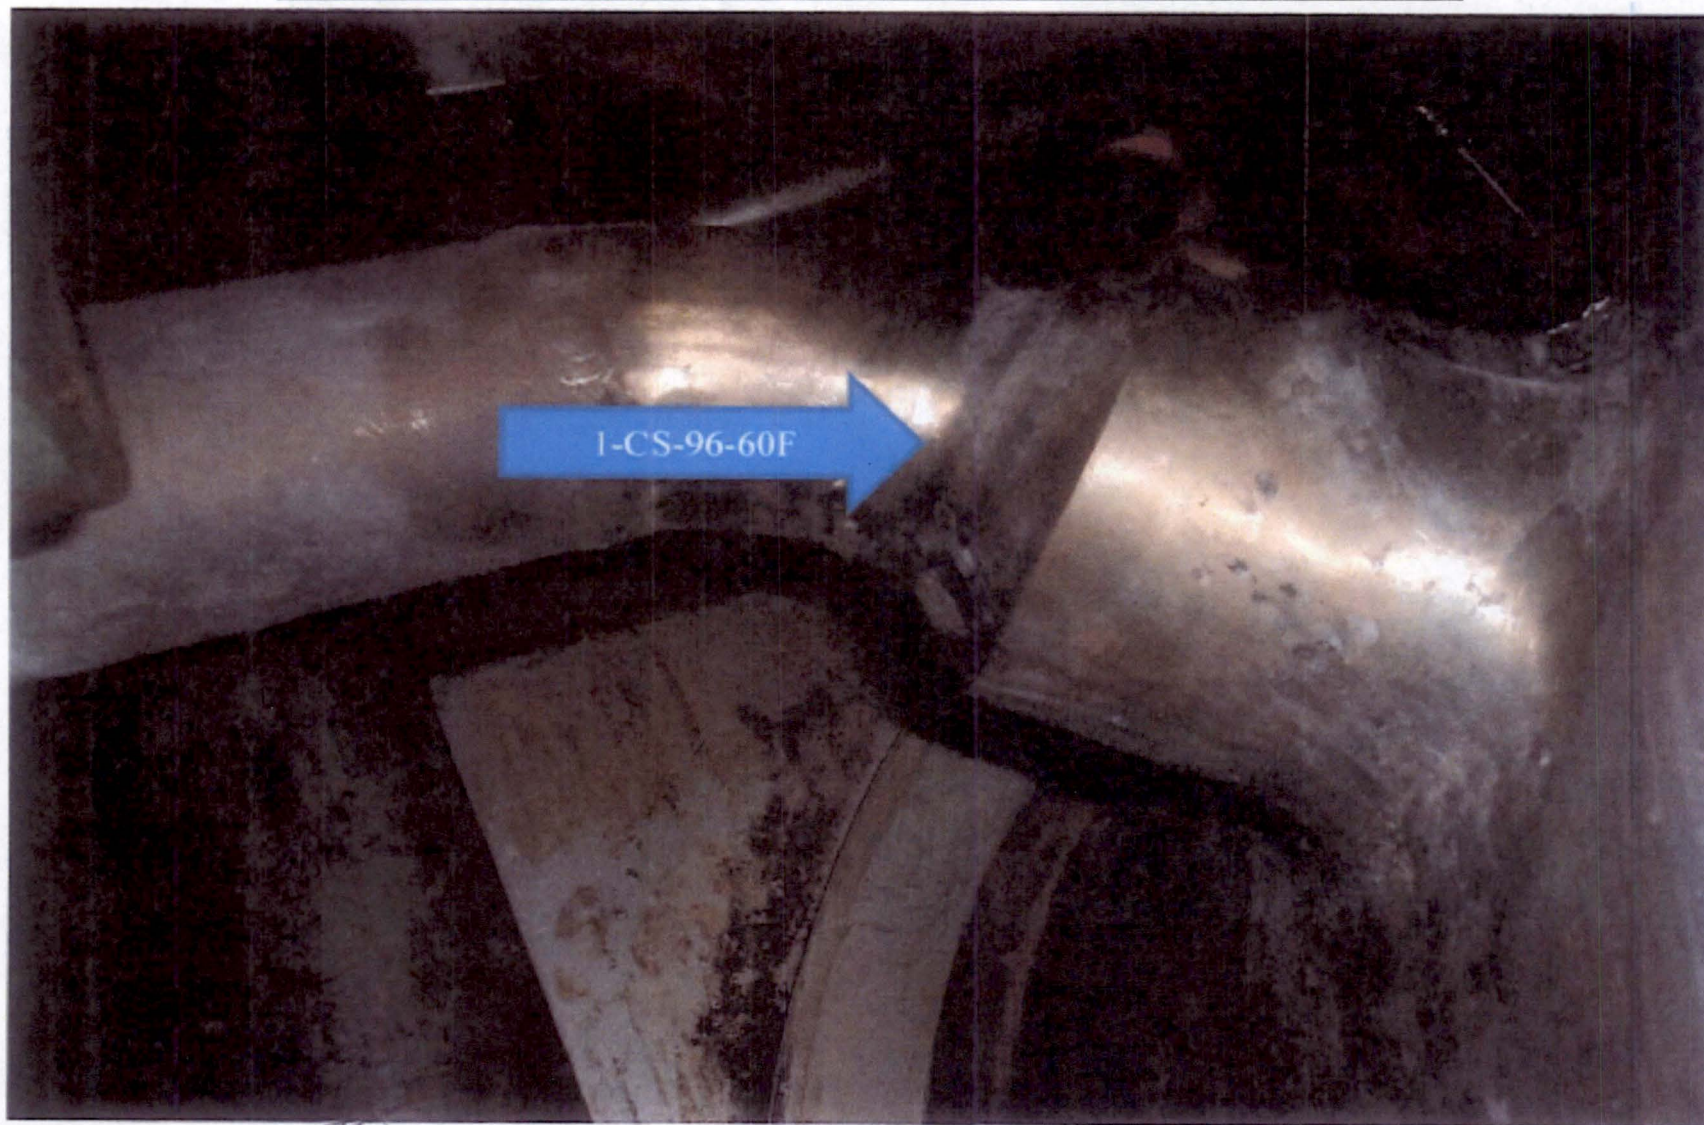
Weld 1-CS-96-60F Component Photograph
